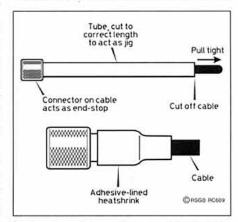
A simple jig for cutting more pieces to cable to the same length. Use adhesive-lined heatshrink sleeving to seal the cable to the plug.
